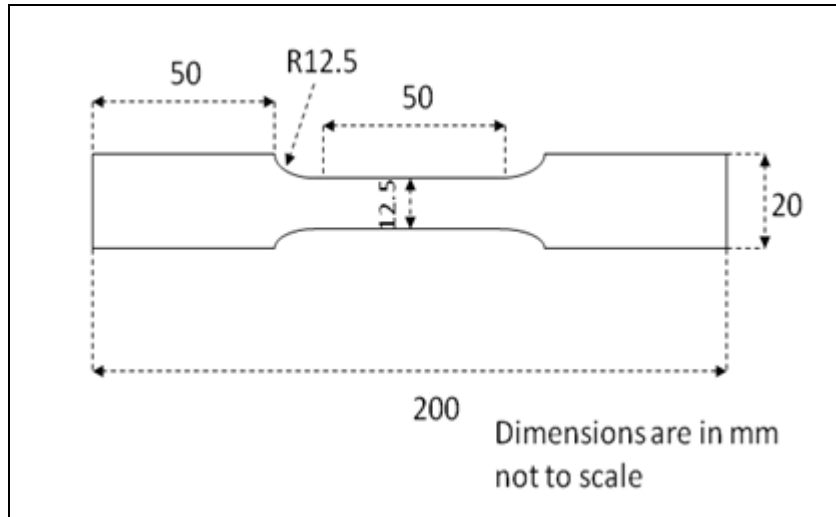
Dimensions of Tensile specimen (ASTM E8)
